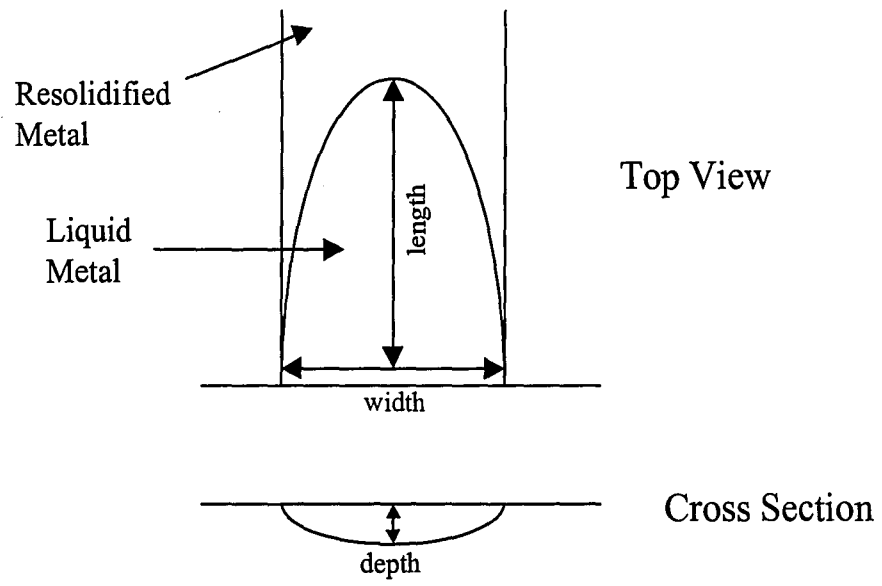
A - Definition of weld pool shape dimensions.
